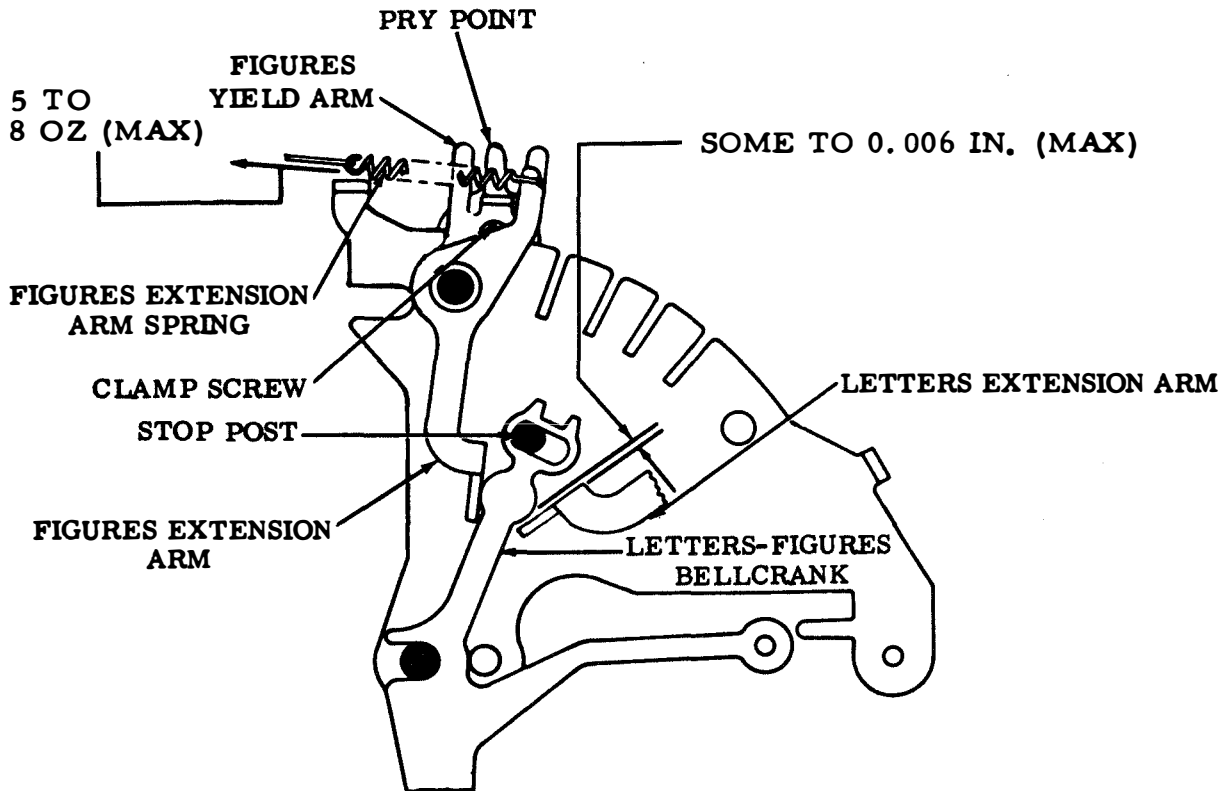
FIGURES Extension Arm Spring and FIGURES Yeild Arm
